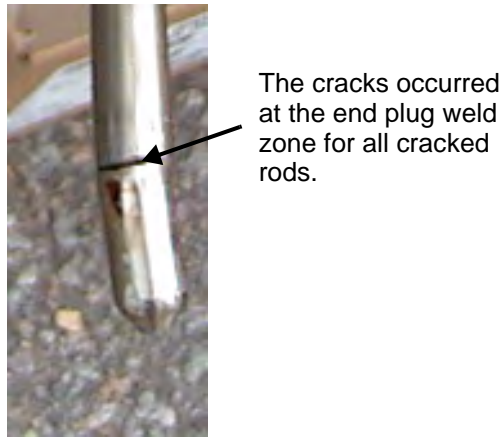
Cracked Rod From CTU Fuel Assembly
